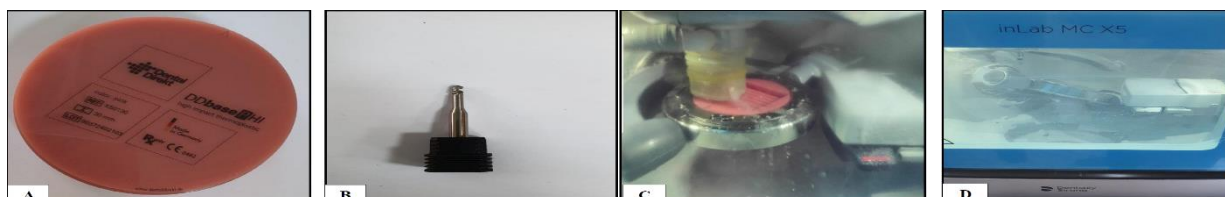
(A) CAD/CAM block, (B) In Lab MC X5- miller for PMMA plastics, and (C, D) Dental milling machine MC X5 in lab
